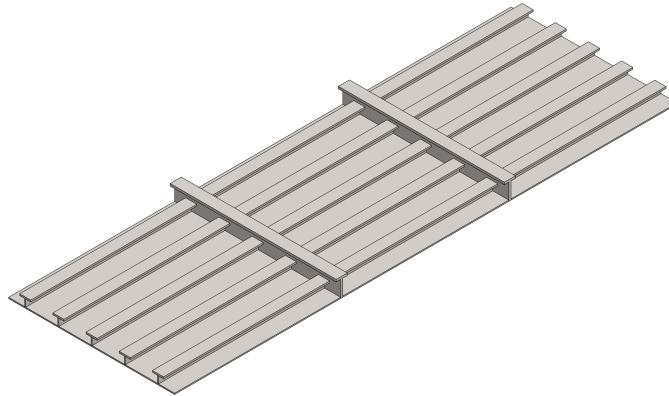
Generic gross ship panel composed by three stiffened plates having 5 longitudinal stiffeners, and being supported transversally by two intermediate transverse frames.
